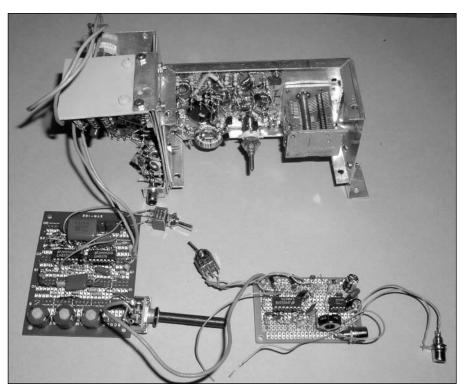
The receiver units prewired and tested together prior to mounting them inside the chassis.
